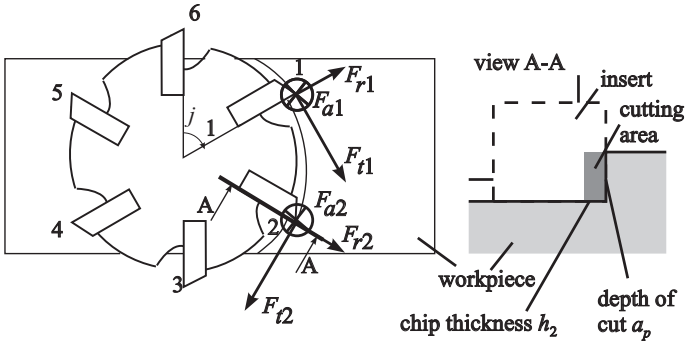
Forces on a milling tool with orthogonal cutting inserts
